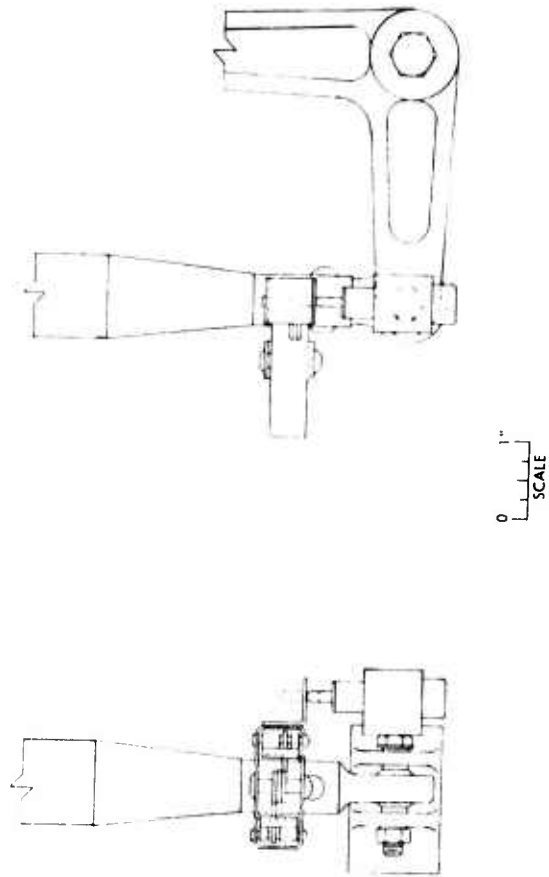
Rod End Bearing Play Sensor (Sheet 4 of 5).
